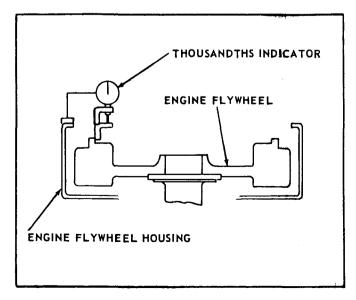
Checking the Driving Ring Pilot Bore of the Engine Flywheel.
